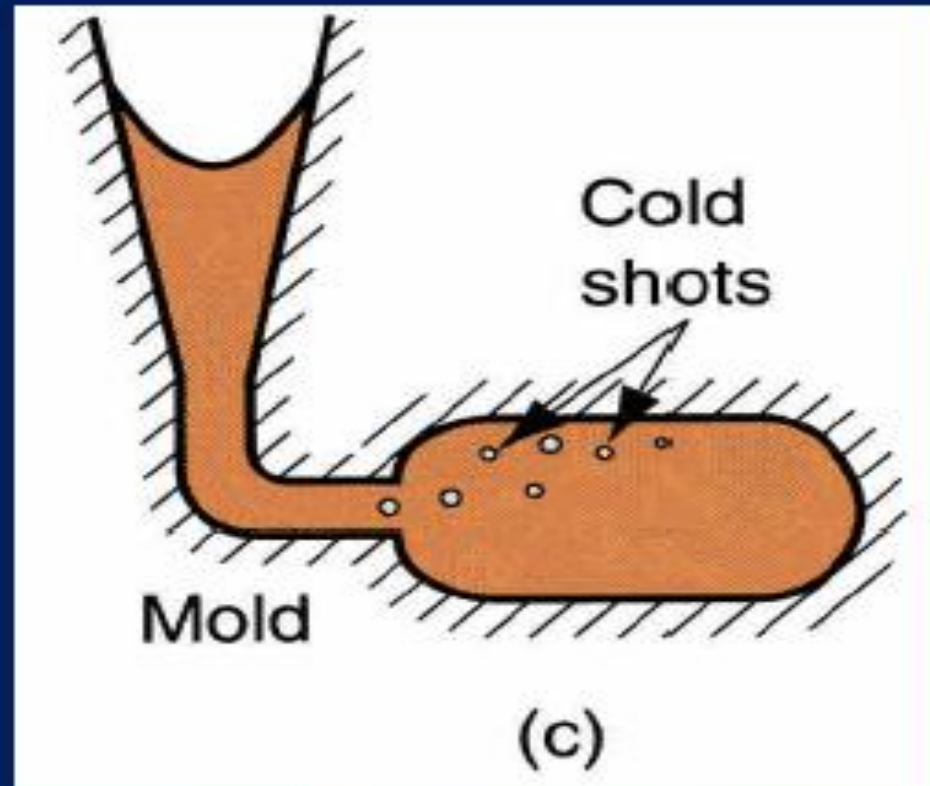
Some common defects in castings: (c) cold shot
